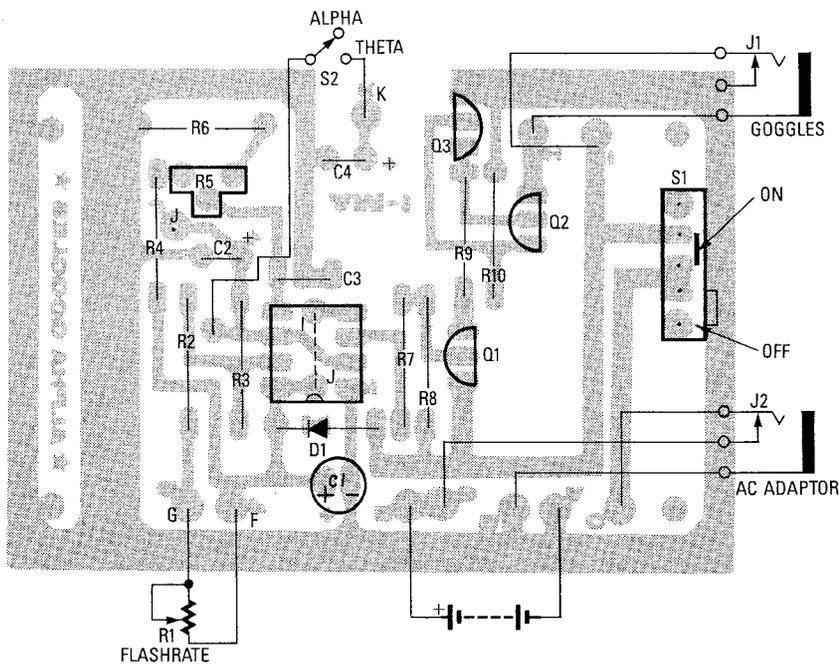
THE PARTS PLACEMENT for the A/MG PC-board shows switch S1 soldered directly on the board. Notice transistor orientation, and the polarity of capacitors and diode D1.
